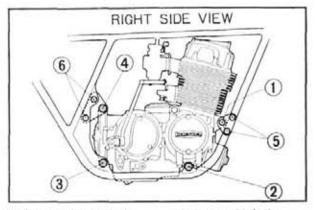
① 10 mm bolt ② Engine hanger bolt A
